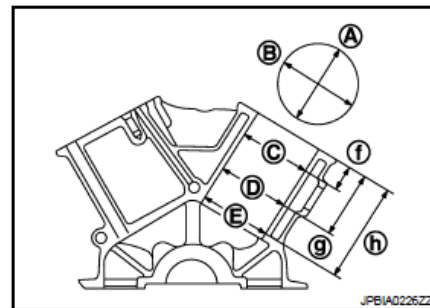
Identifying Piston To Cylinder Bore Clearance
